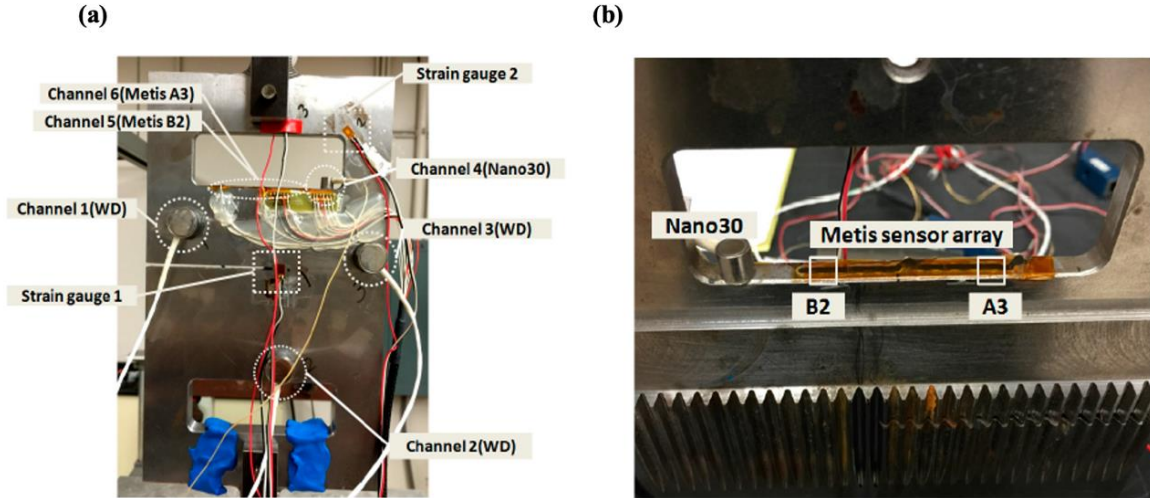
Idealized flattened bevel gear spline showing (a) test geometry with AE sensors, channels 1 to 4 and (b) Metis sensor array used as AE and UT sensors [1].
